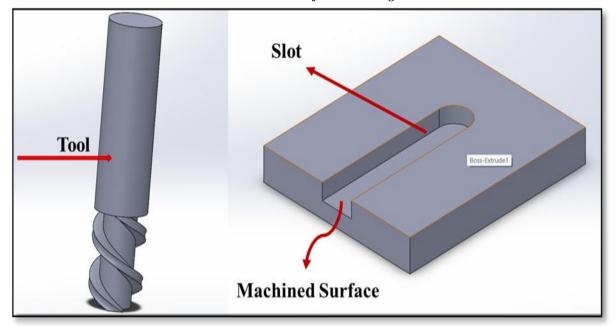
A 3-D view of the Substrate after machining (cutting slot)
